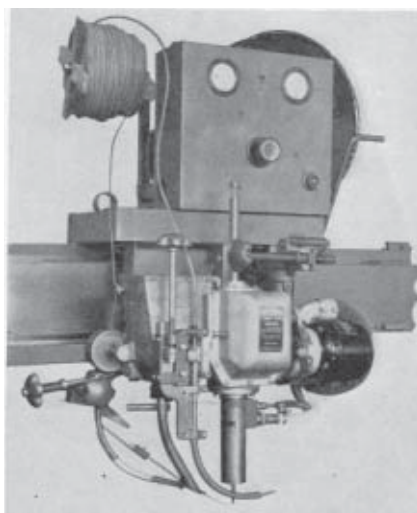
Electronic tornado automatic carbon arc welding machine.
